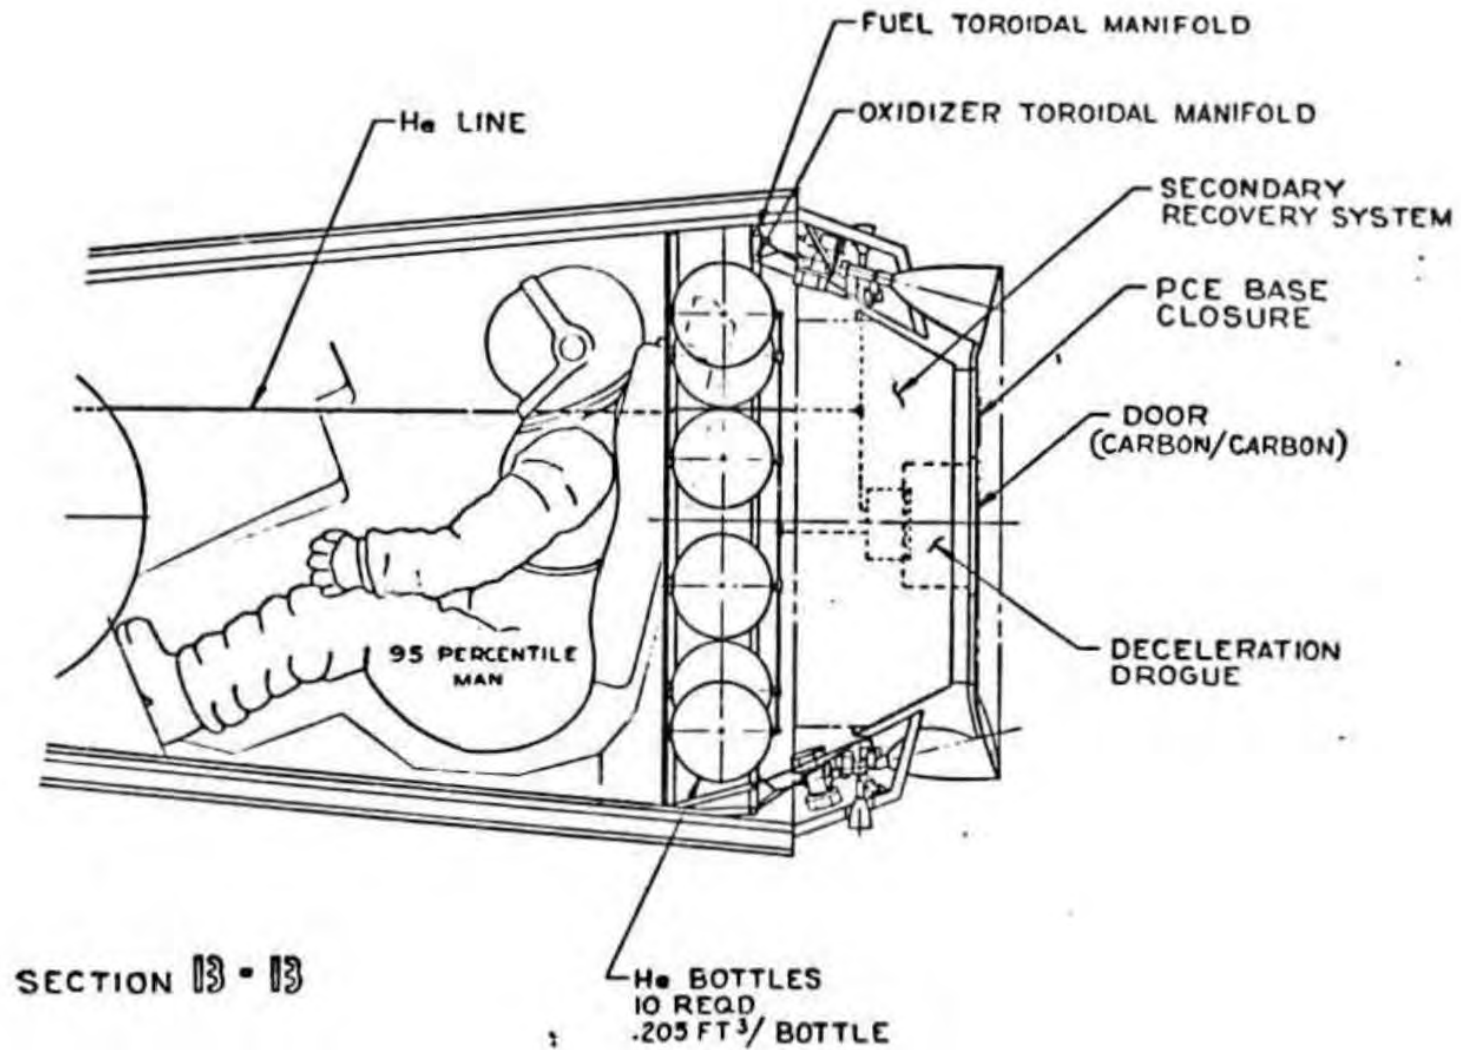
N₂O₄/MMH Plug Cluster Engine (Side View)
